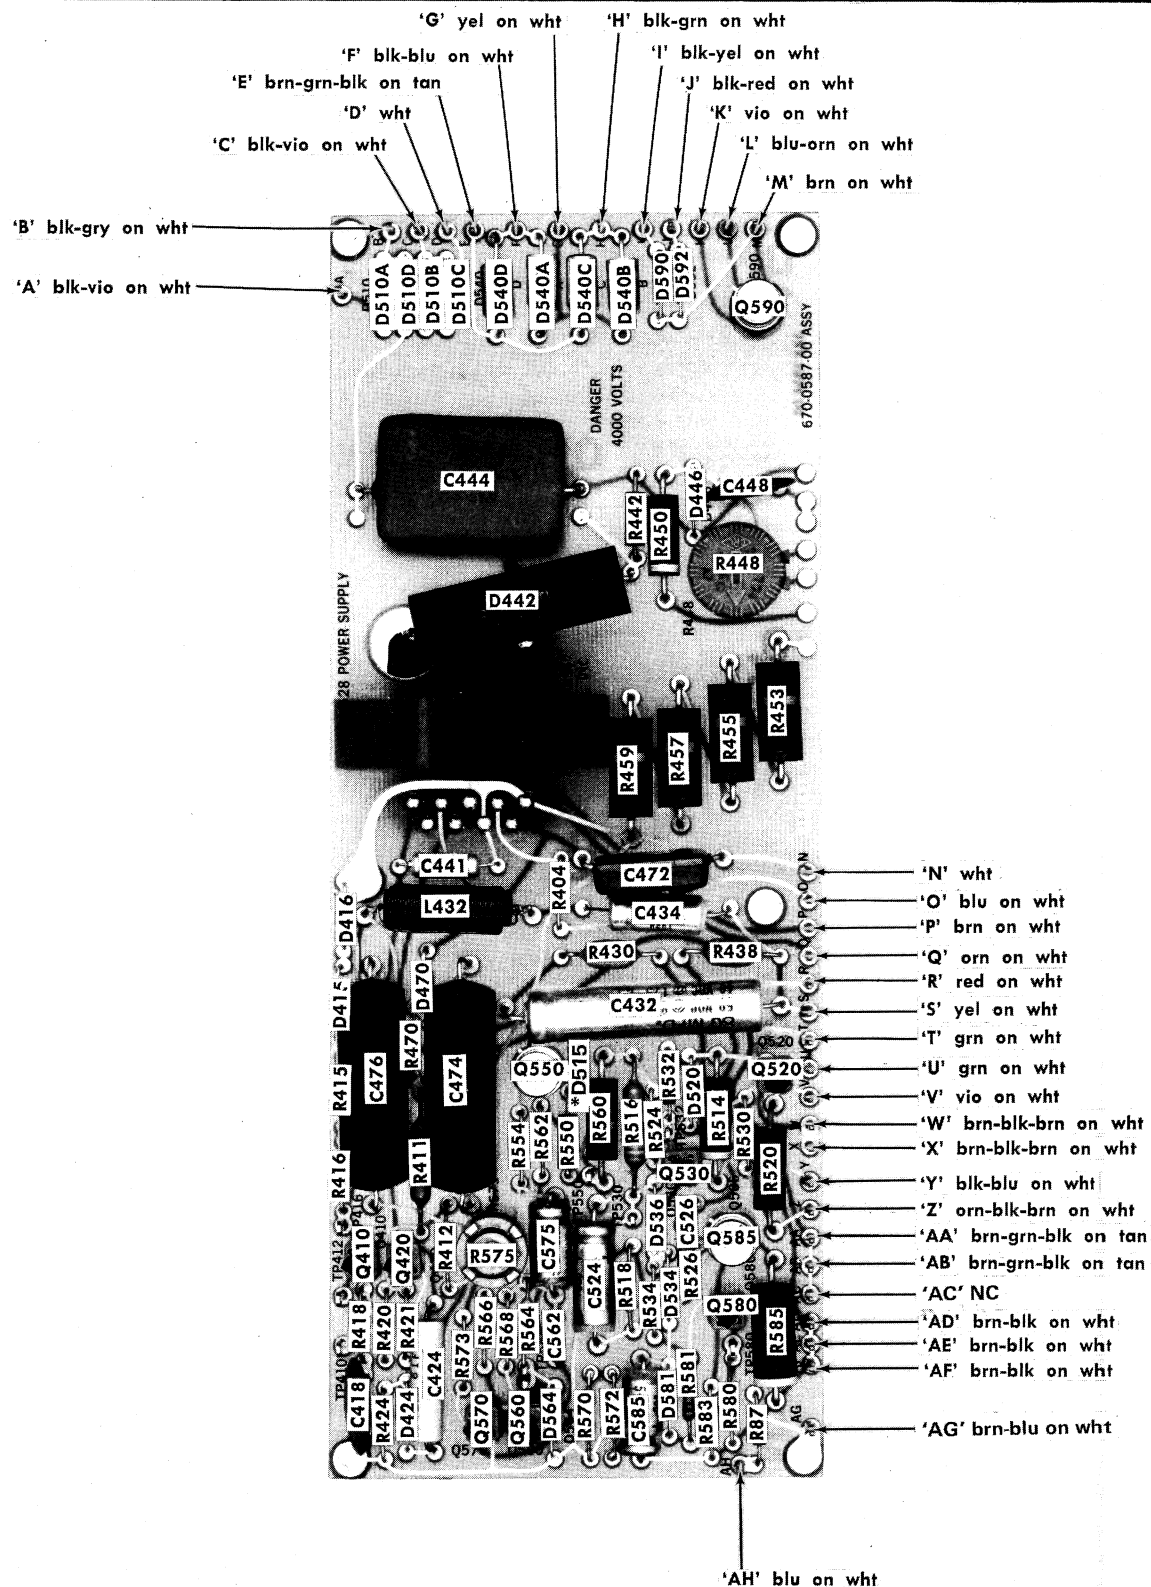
Bottom view of Main board showing components and wire color codes.
